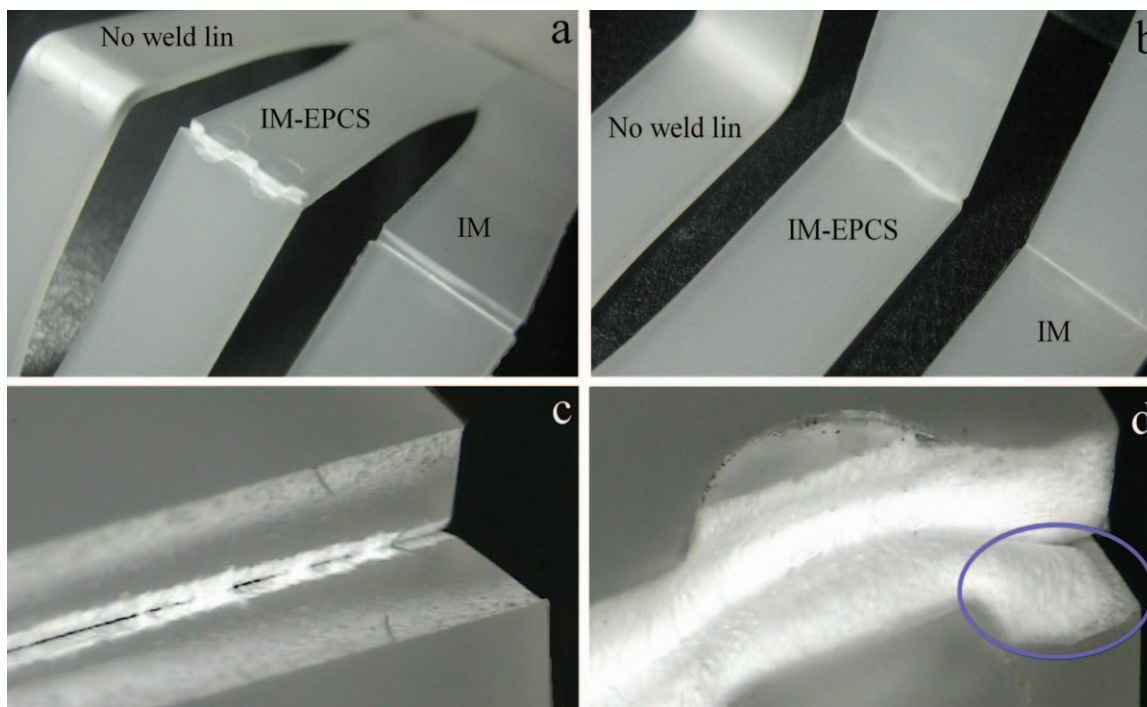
Weld lines of PP specimens: (a) top view, (b) back view, (c) IM, and (d) IM-EPCS. [Color figure can be viewed in the online issue, which is available at wileyonlinelibrary.com.]
